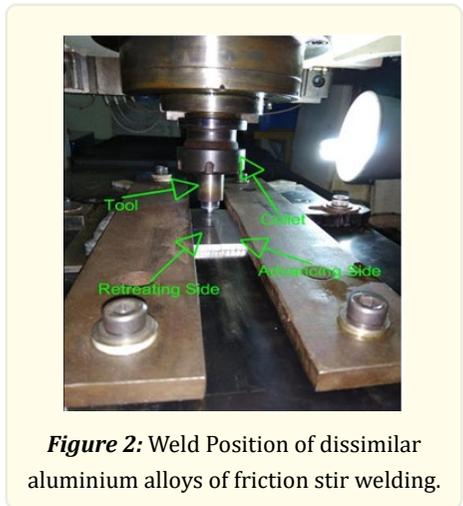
Weld Position of dissimilar aluminium alloys of friction stir welding.
